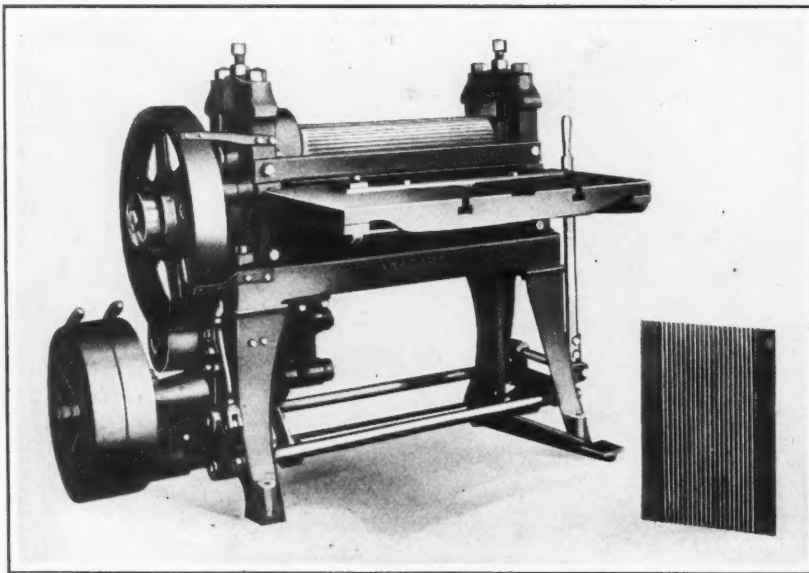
Corrugating Machine on which the First Operation on the Blank is performed
